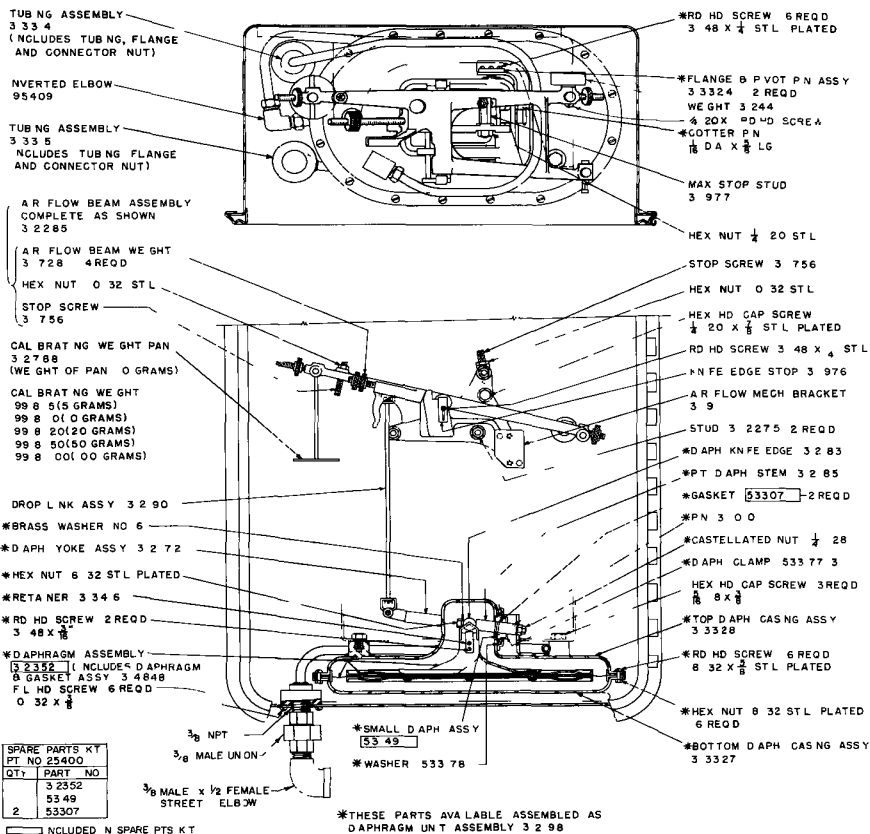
Parts Drawing M61 15, Type CE Diaphragm and Air Flow Beam Assembly
